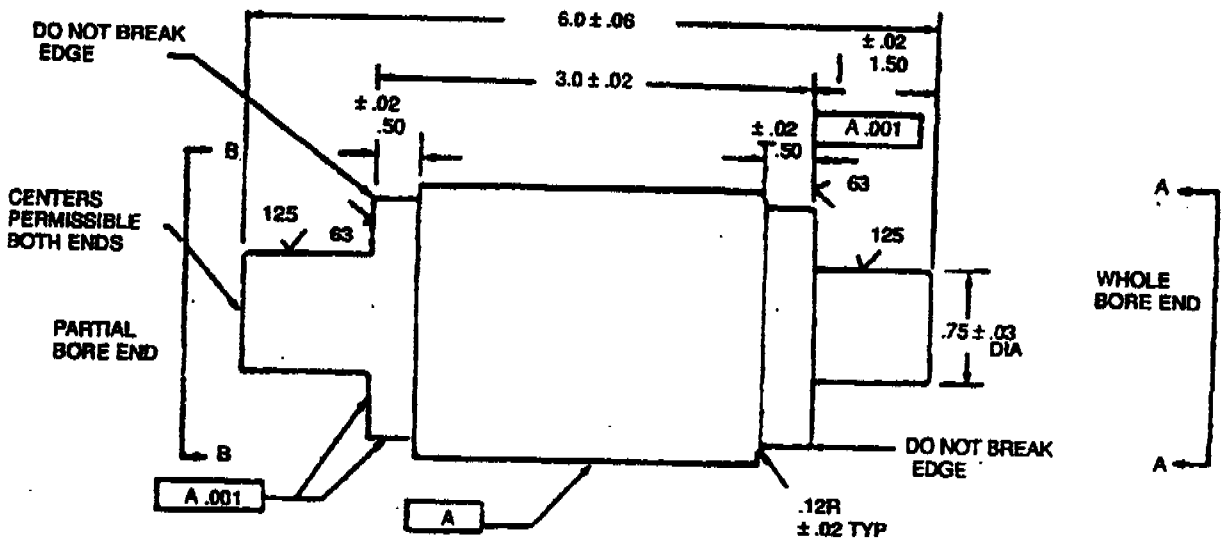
Depth Gauge for Inspection of Helical Gearshaft Internal Splines.
